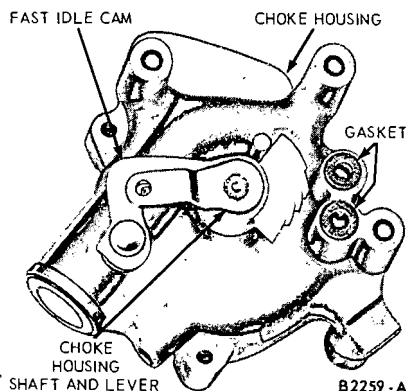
Choke Housing Linkage Installed—Holley 4-V
